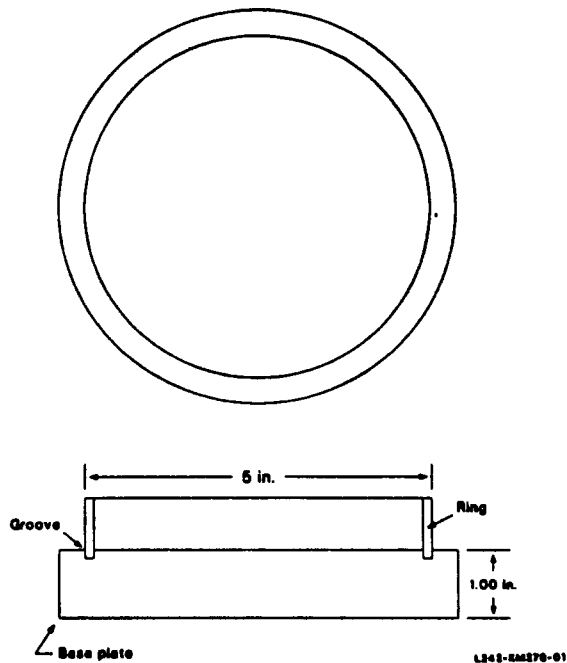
Schematic drawing of 5 in. metallographic mount.
